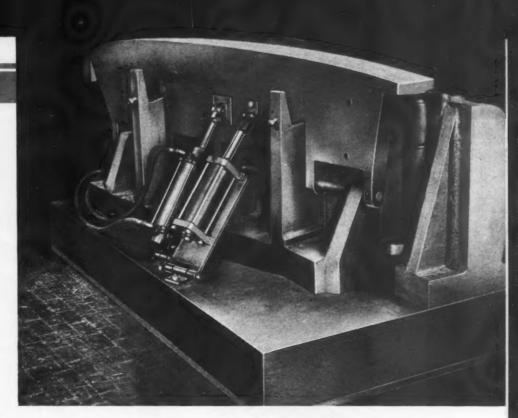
Inspection Fixtures have been Developed to Insure Accuracy of Contour Lines where Front Fenders Fit the Automobile Doors, Engine Hood, and Radiator Grille. There are Similar Fixtures for Rear Fenders
